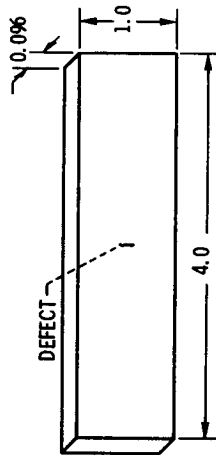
Schematic of specimen with defects (T-75/PR288 [45, -45, 90, 0, 0]), all dimensions are in inches).
